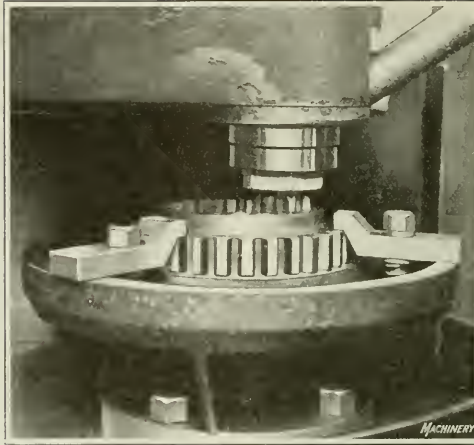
Cutting an Internal Gear on a Gear Shaper
